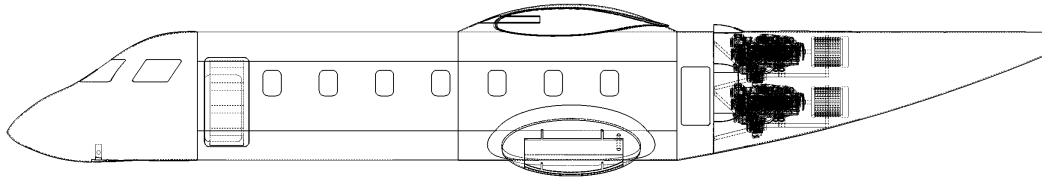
Technical drawing of the fuselage side view with the engines and generators in the tailcone.
